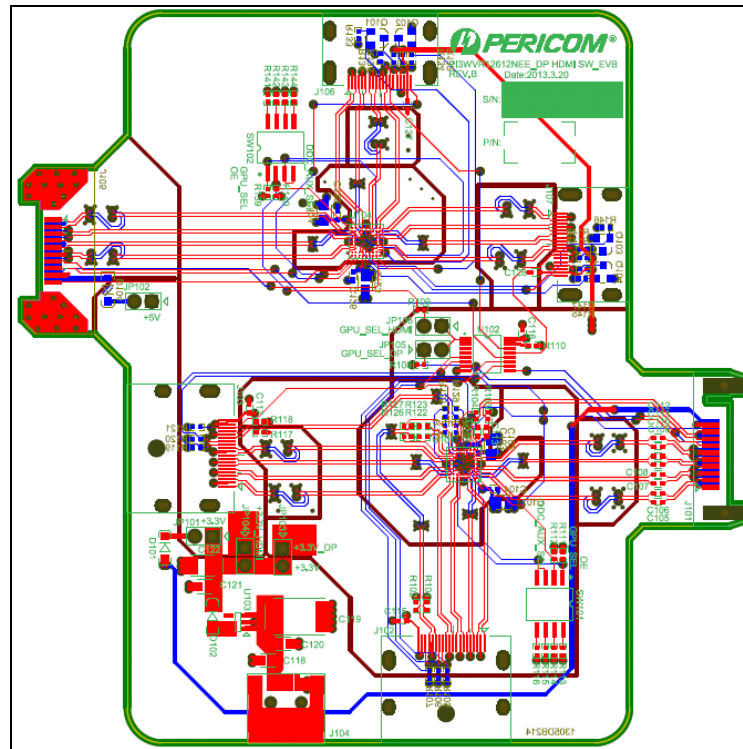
Layout of PI3WVR12612 Demo Board Rev.B
